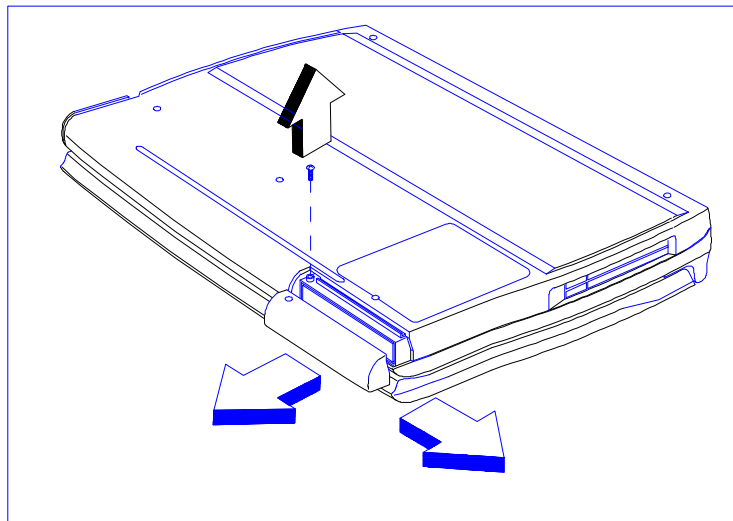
Removing the Hard Disk Drive Bay Cover
